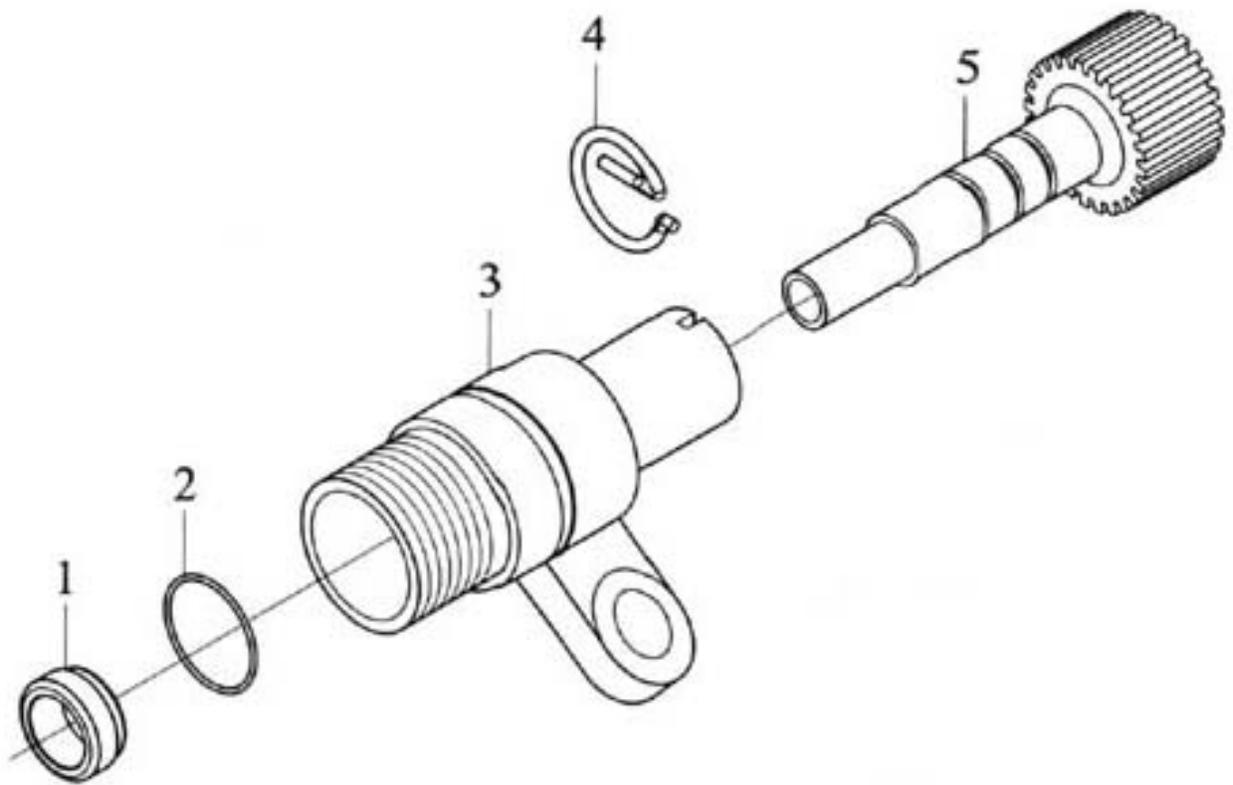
Transmission Odometer Driven Gear Assembly
